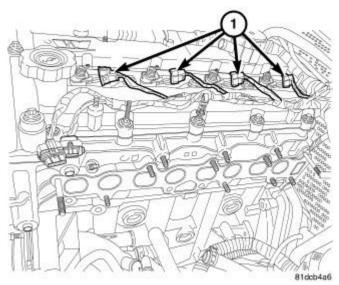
Fuel Injector Harness Courtesy of CHRYSLER LLC
